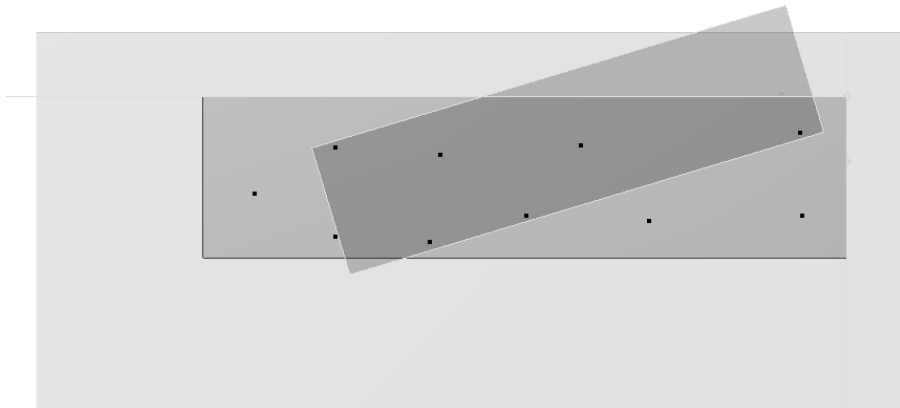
Top view of CMM inspection points and perfect plane.
